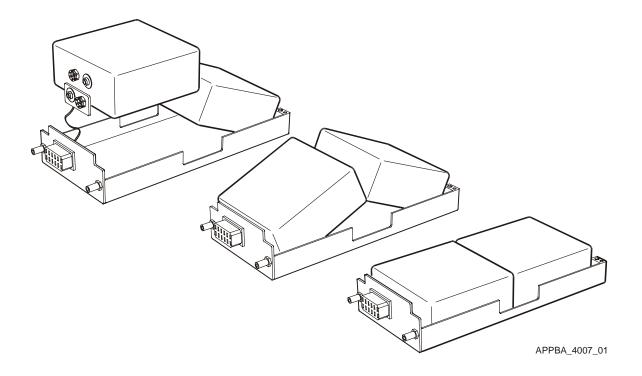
Install Rechargeable Batteries in Battery Carrier Assembly
